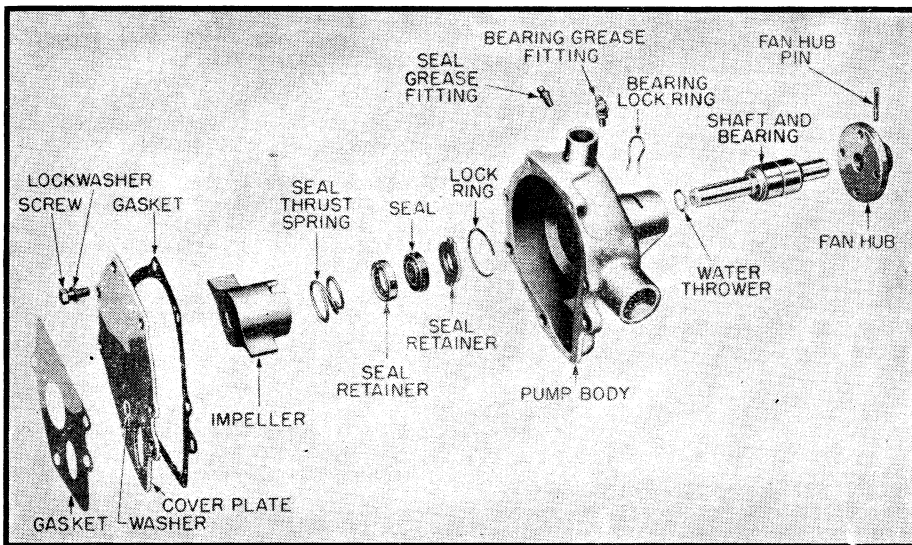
Water pump with integral bearing and shaft. Six-cylinder engines
